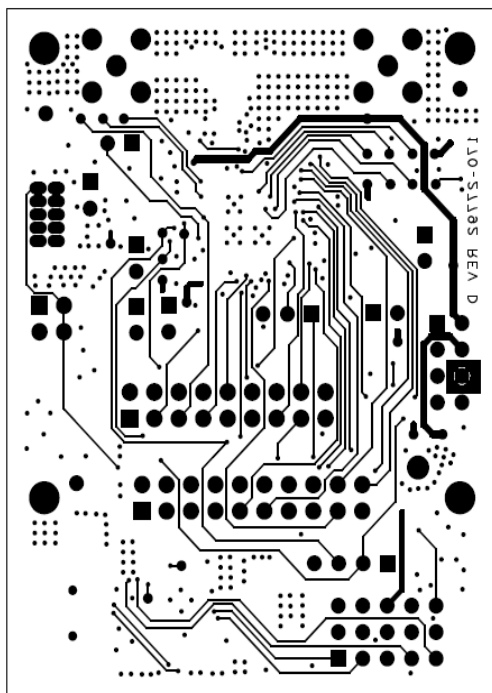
Modular Reference Board PCB Layout (Bottom View)
